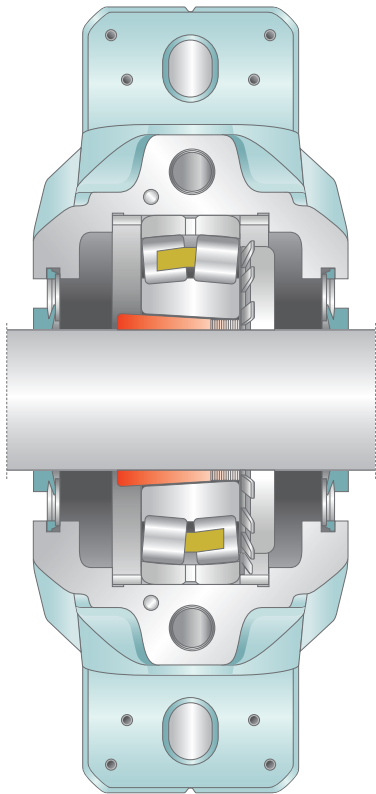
Bearing with adapter sleeve on a shouldered shaft
